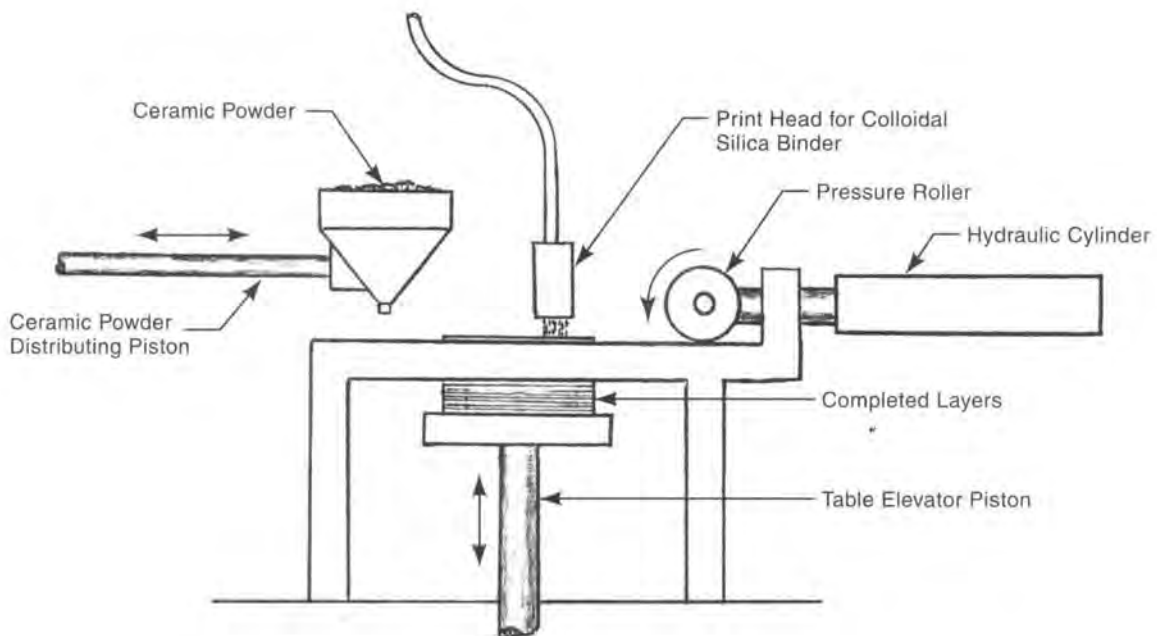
B1 A schematic representation of the DSPC process for making ceramic molds using rapid prototyping techniques. Ceramic powder, deposited in layers and roller pressed to be level, is bonded with colloidal silica. After all layers are completed, the mold halves are removed from the machine, loose powder is removed and the mold halves are fired in a kiln.
